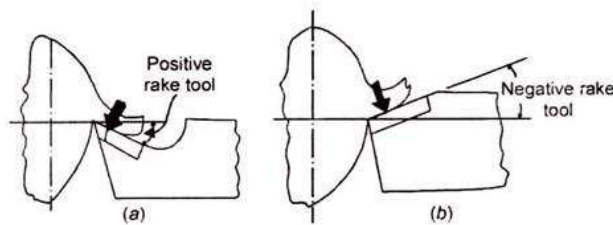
Cutting Process Using Positive and Negative Rake Tools.
